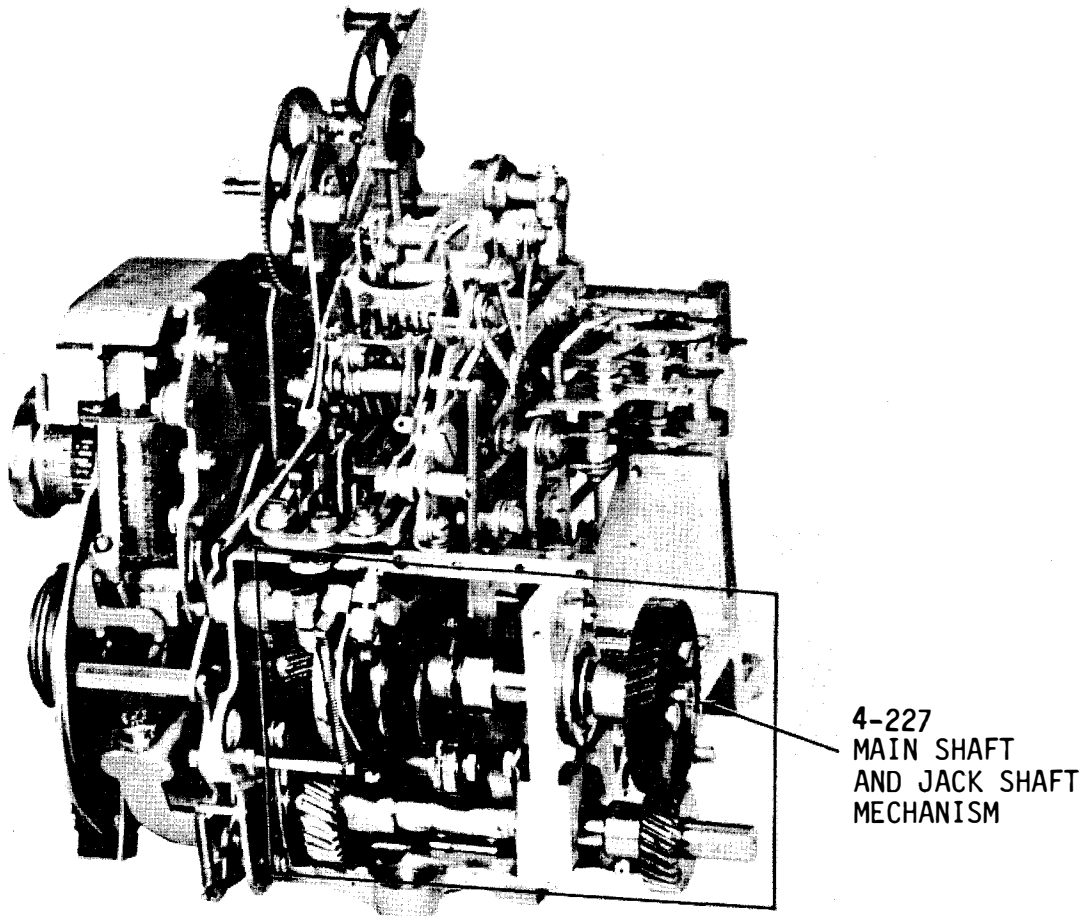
Main Shaft and Jack Shaft Location on ASR 28 Typing Reperforator Unit
